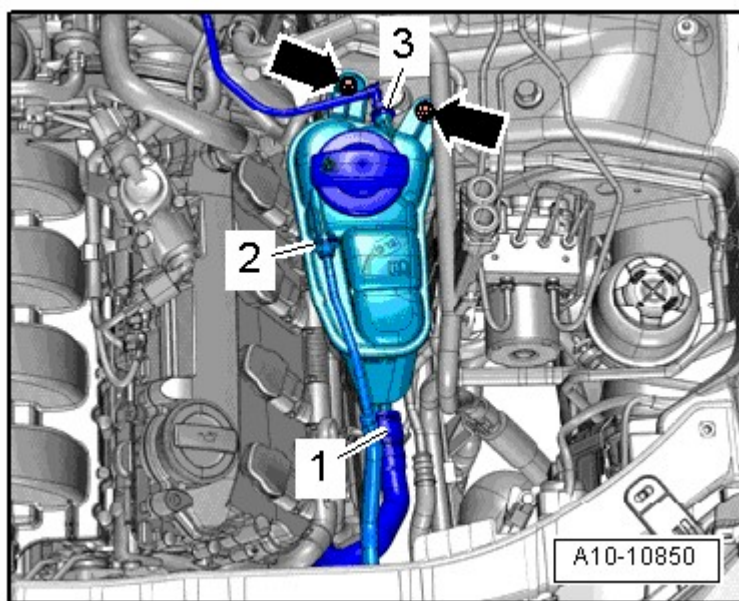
Identifying Coolant Hose And Coolant Reservoir
